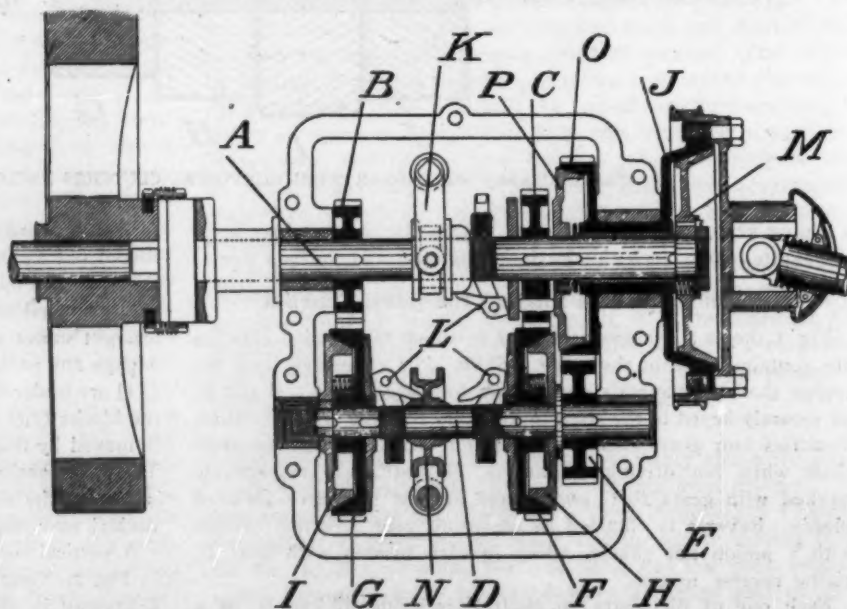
INDIVIDUAL CLUTCH CHANGE-SPEED GEAR WITH CONE CLUTCHES.
